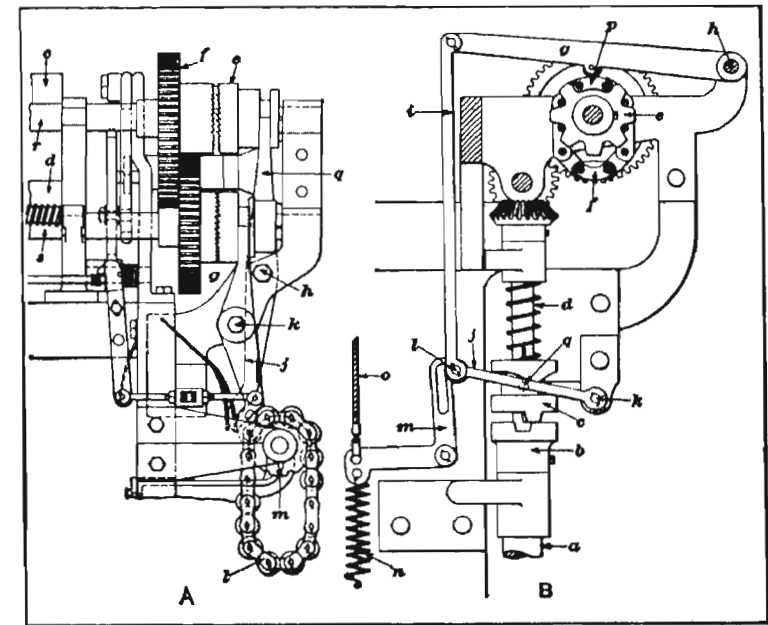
Mechanisms Equipped with Endless Chains for Controlling Engagement and Disengagement of Clutches
